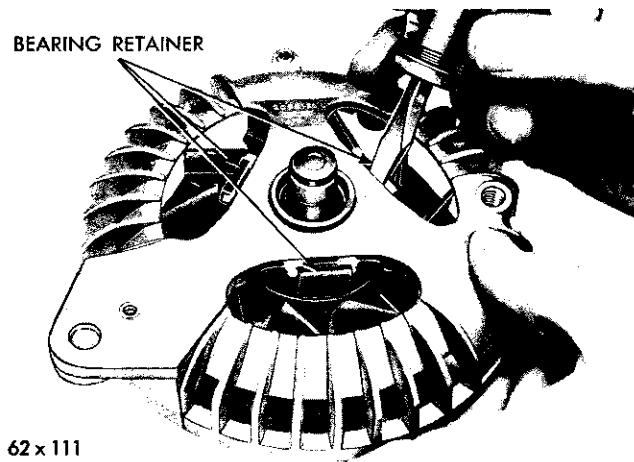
Disengaging the Bearing Retainer from the End Shield
